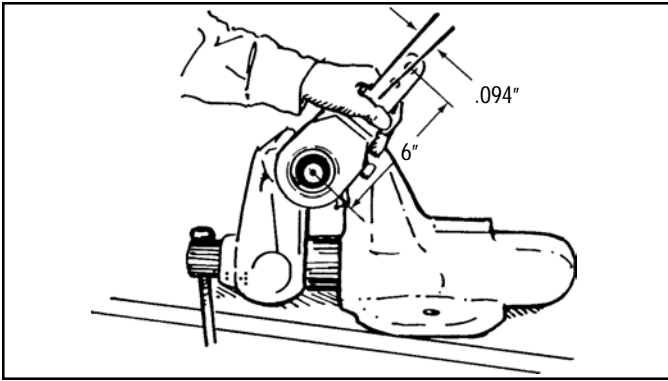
CHECKING SLACK ADJUSTER BACKLASH
